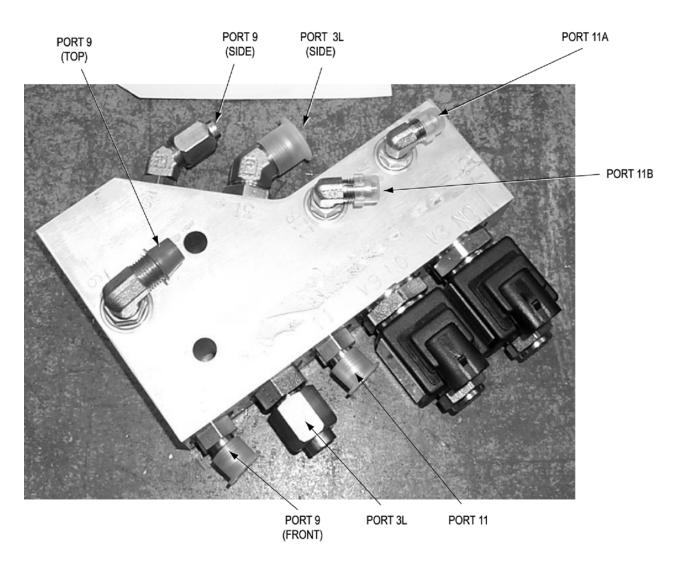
Identification of Forward Left Manifold Assembly ports
